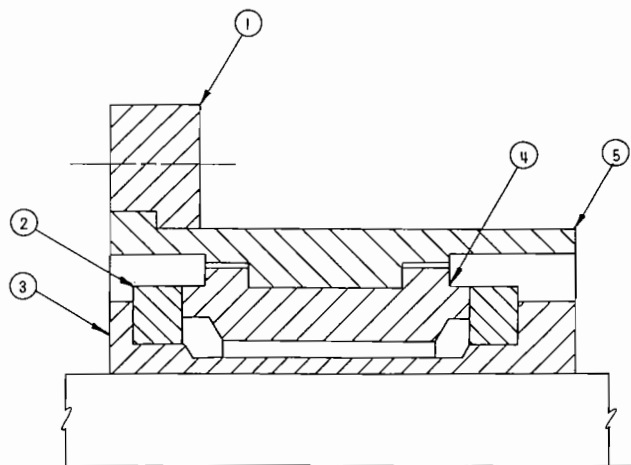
Symmetrical Package Seal and Major Components: (1) Mounting Flange, (2) Mating Rings, (3) Sleeve, (4) Primary Seals, (5) Housing.
